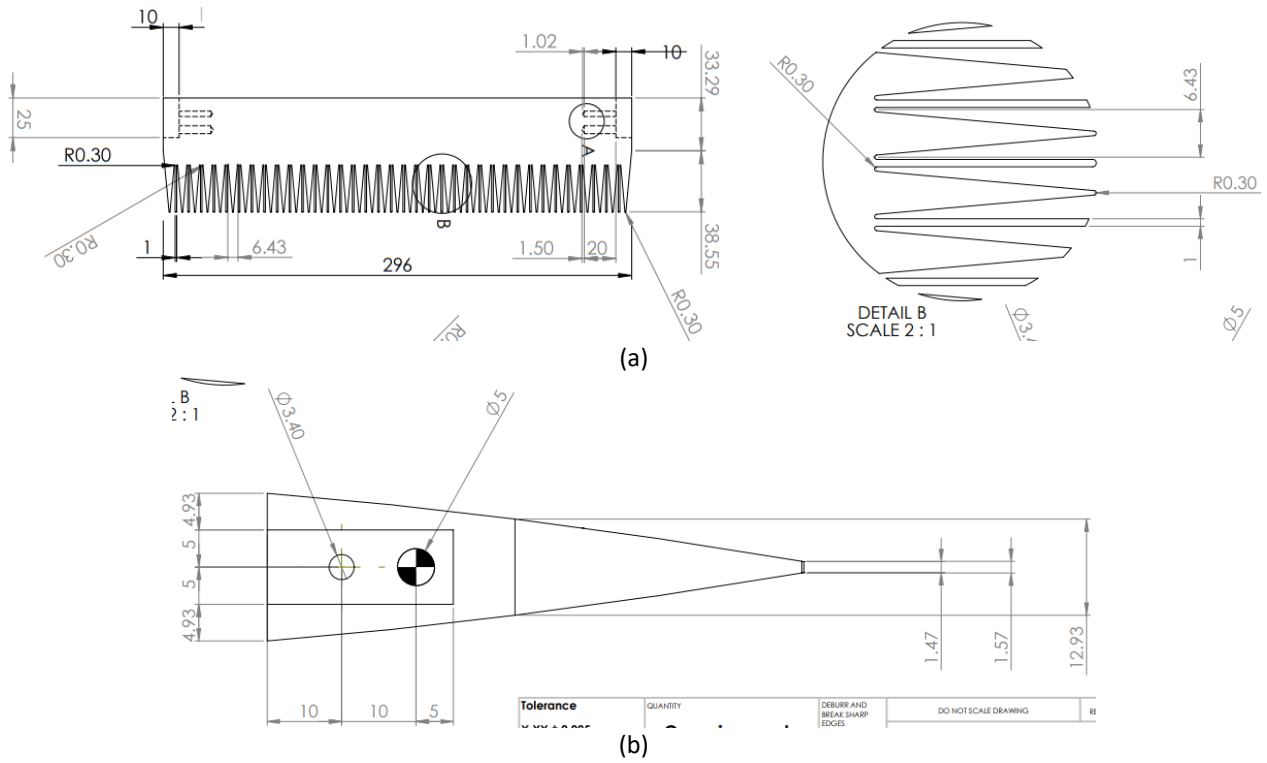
Combed-serrated trailing edge with dimensions on (a) top view and (b) side view
